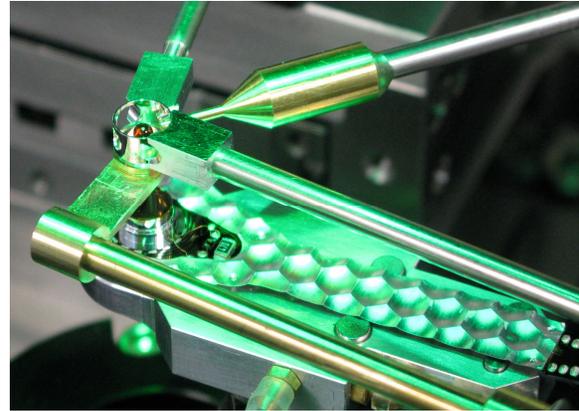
A view of the operating arena of the FlexFAM. The lower target half subassembly lies below the tooling used to manipulate the capsule fill-tube assembly and diagnostic band.
